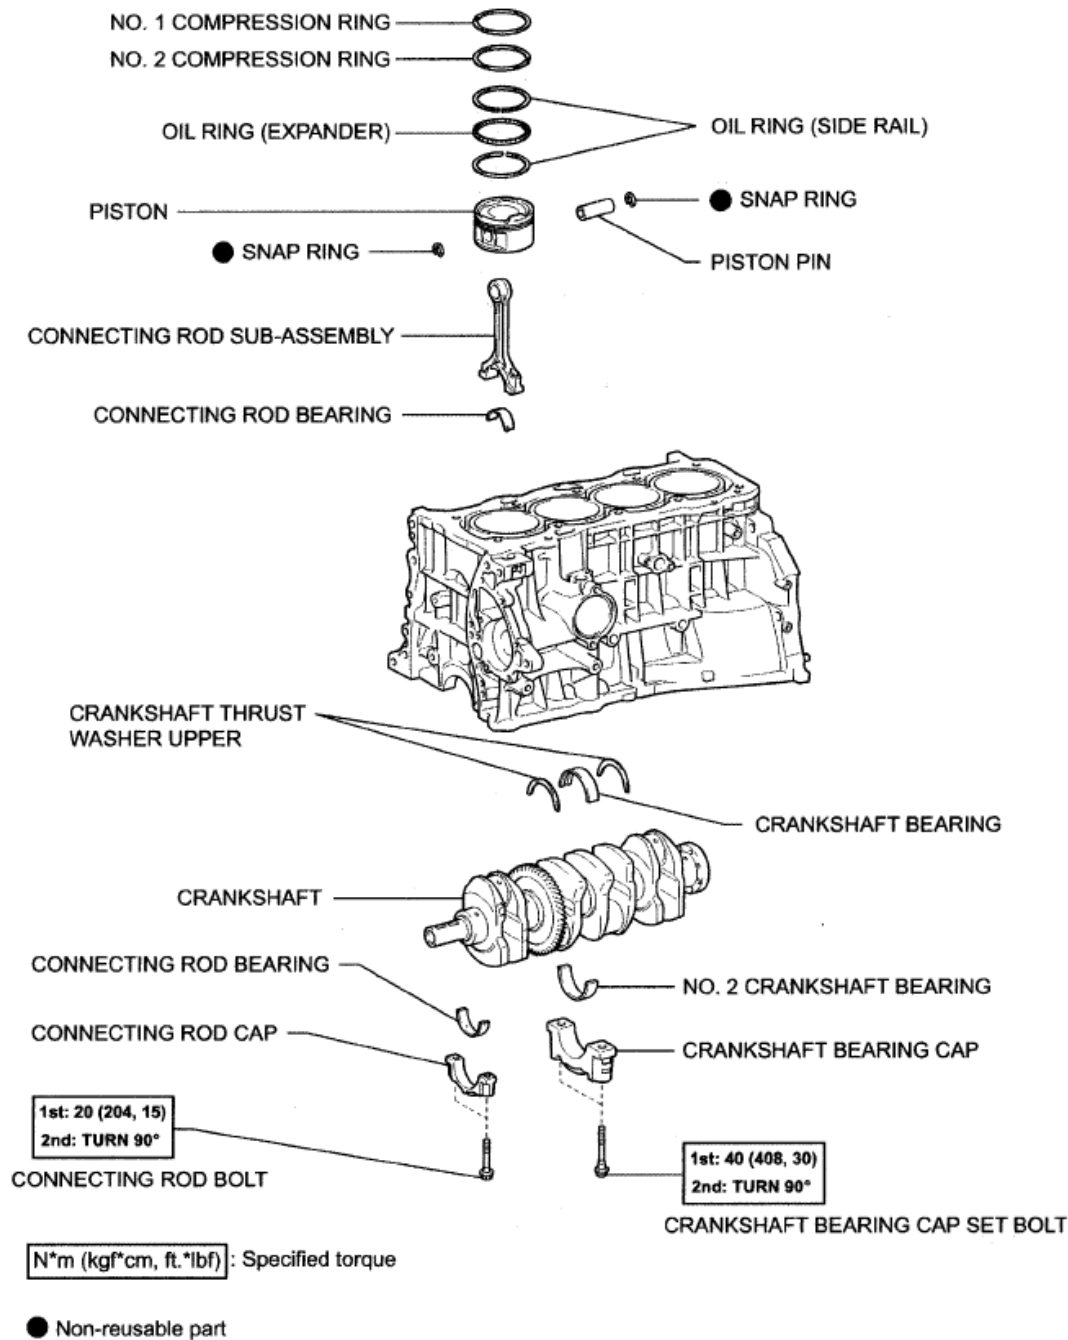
Identifying Engine Unit Components With Specification (6 Of 6)
